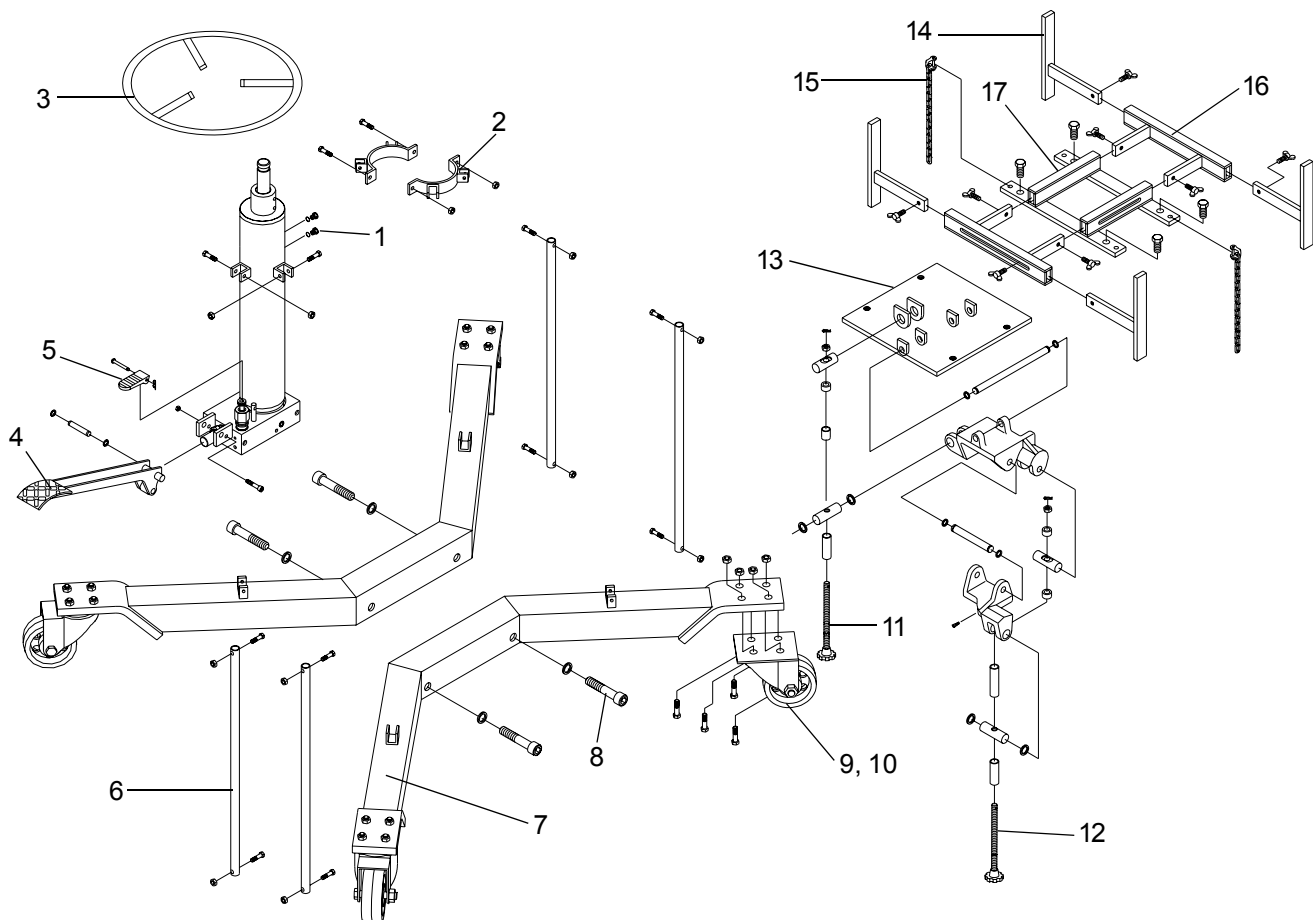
Replacement Parts Illustration for Model KTI-63505
